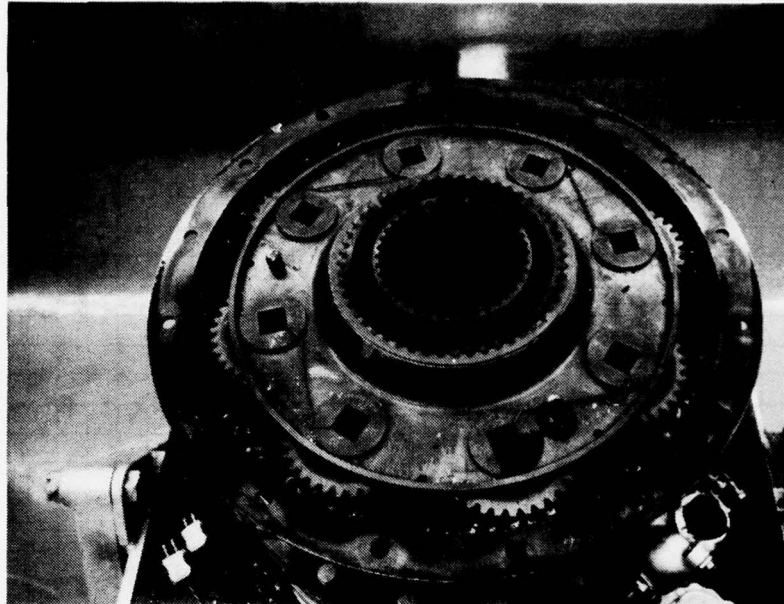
Upper planetary assembly prior to removal from ring gear case after fourth loss-of-lube test.
